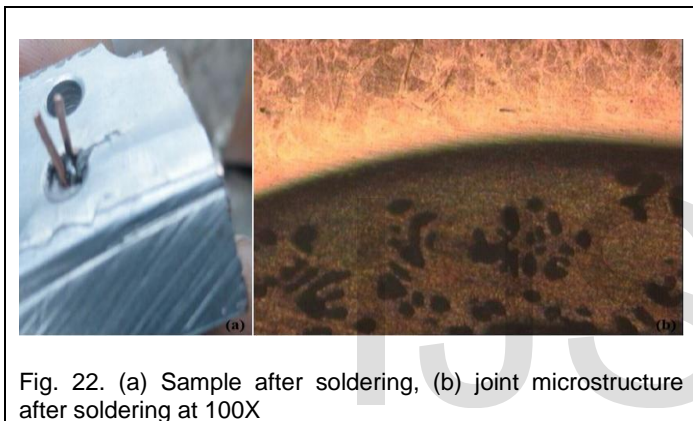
(a) Sample after soldering, (b) joint microstructure after soldering at 100X
